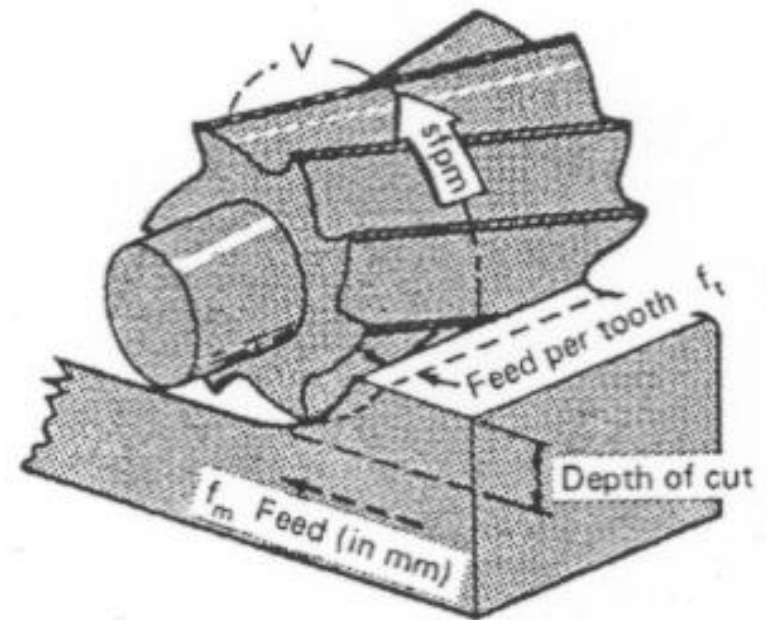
FIGURE Slab milling is an example of a multiple tooth-cutting process which creates a flat surface.
